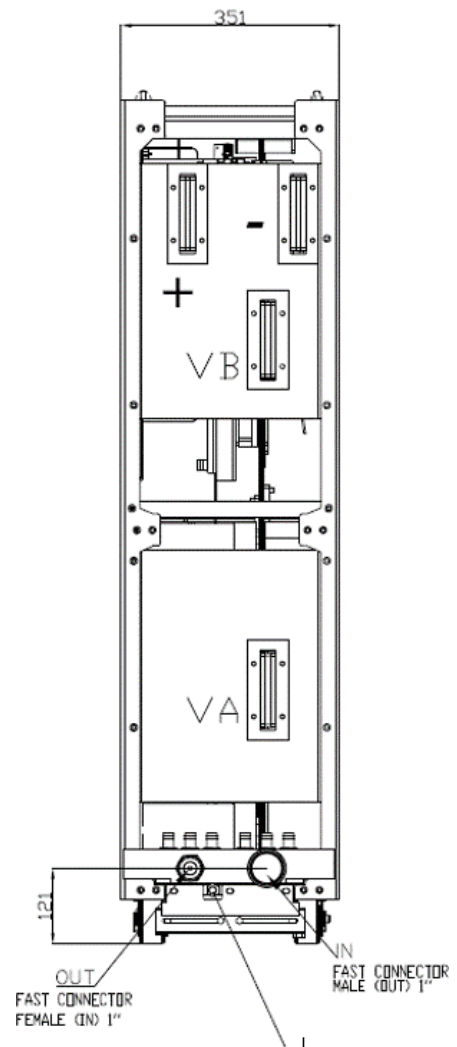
V06.LFT and SD840V06.LFT rear side view
